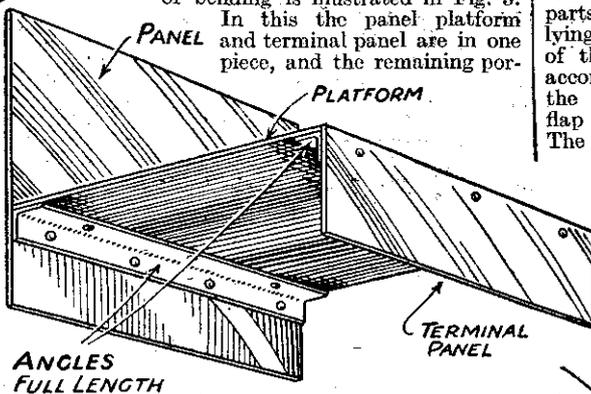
A metal chassis using angle-irons instead of bending the aluminium.
